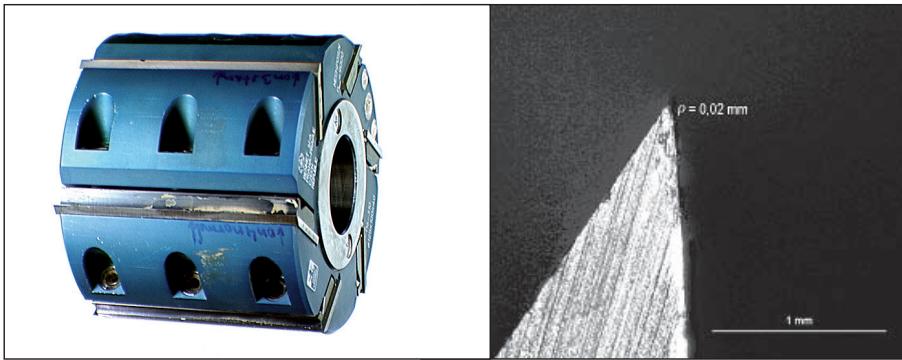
Milling head of Benmet Ltd. and the condition of knife edge
